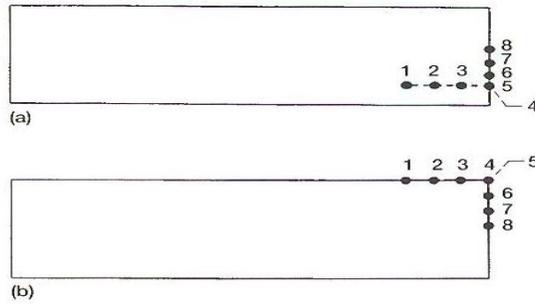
Edge contact caused by $\Delta\gamma$ or $\Delta\lambda p1=3$ arc min. (a) Pinion tooth surface (b) Gear tooth surface.
